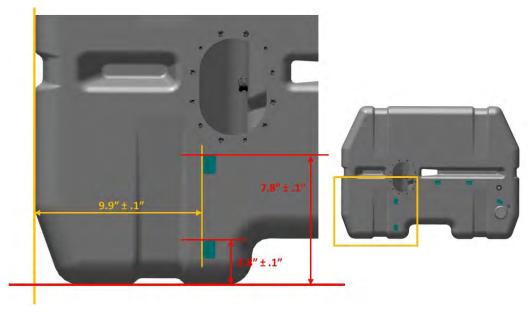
CABLE TIE ANCHOR MOUNT EXTERIOR LOCATIONS 1 & 2
